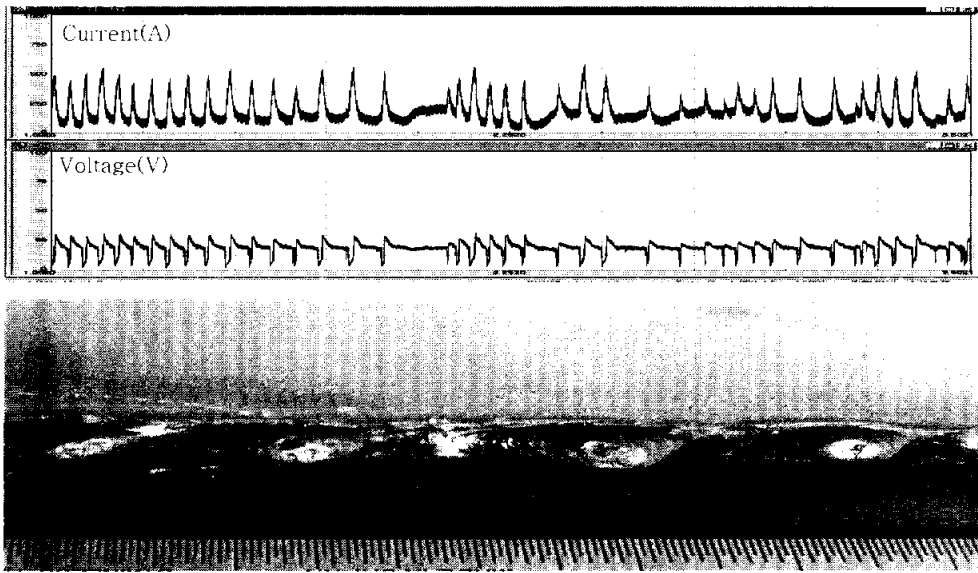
Waveforms and bead shape at welding current 187A
